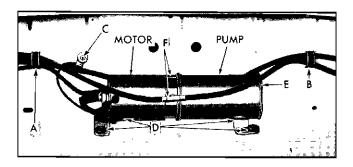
Hydro-Lectric Motor and Pump Assembly
